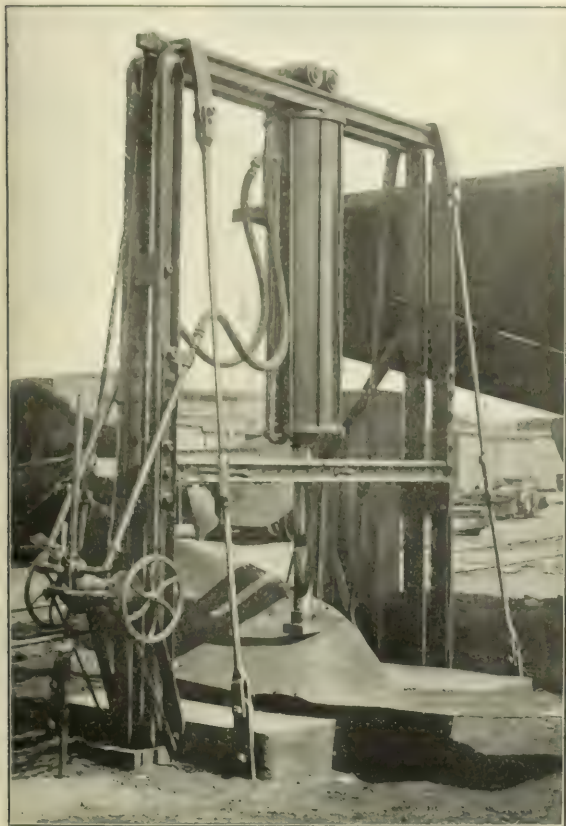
Air Press Straightening a Damaged Steel Plate. be expanded or contracted. With it and a drill press equipped with an air clamp, a rod may be reamed and handled, floor to floor, in five minutes.
